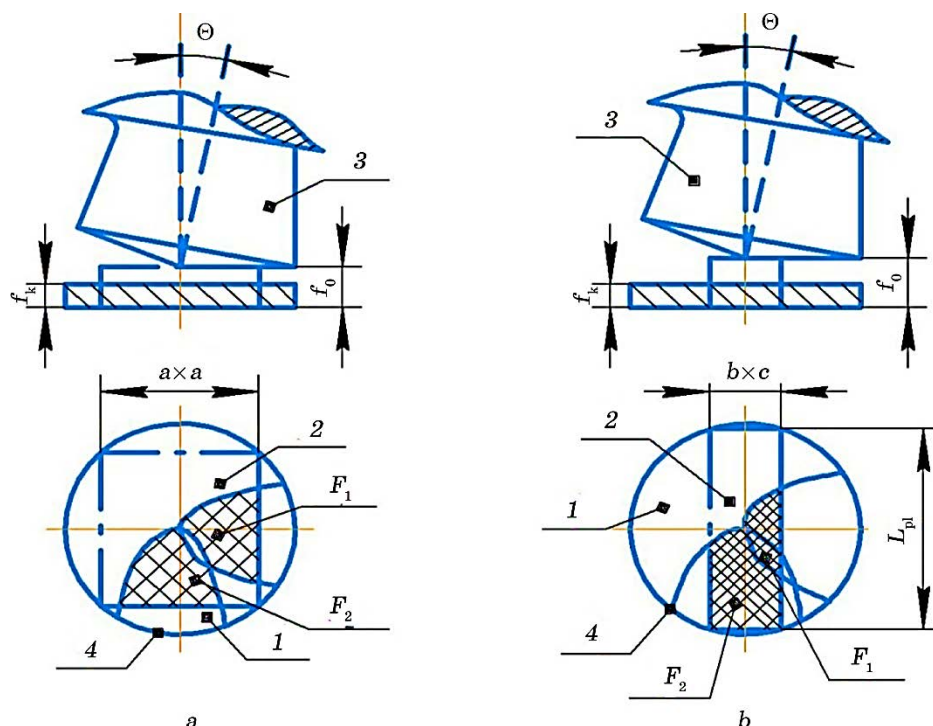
Scheme of rolling stamping of flat workpieces (circles): *a*) punching from a sheet; *b*) punching from a strip. 1—stamped circle; 2—initial workpiece; 3—punch; 4—matrix.
